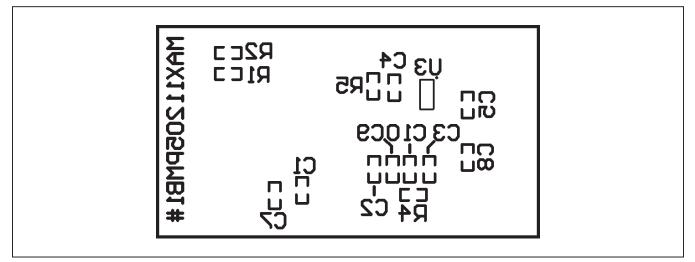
MAX11205PMB1 Peripheral Module Component Placement Guide—Solder Side
